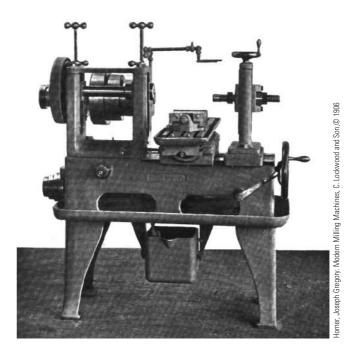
An early milling machine from around 1860. Horner, Joseph Gregory. Modern milling machines.
